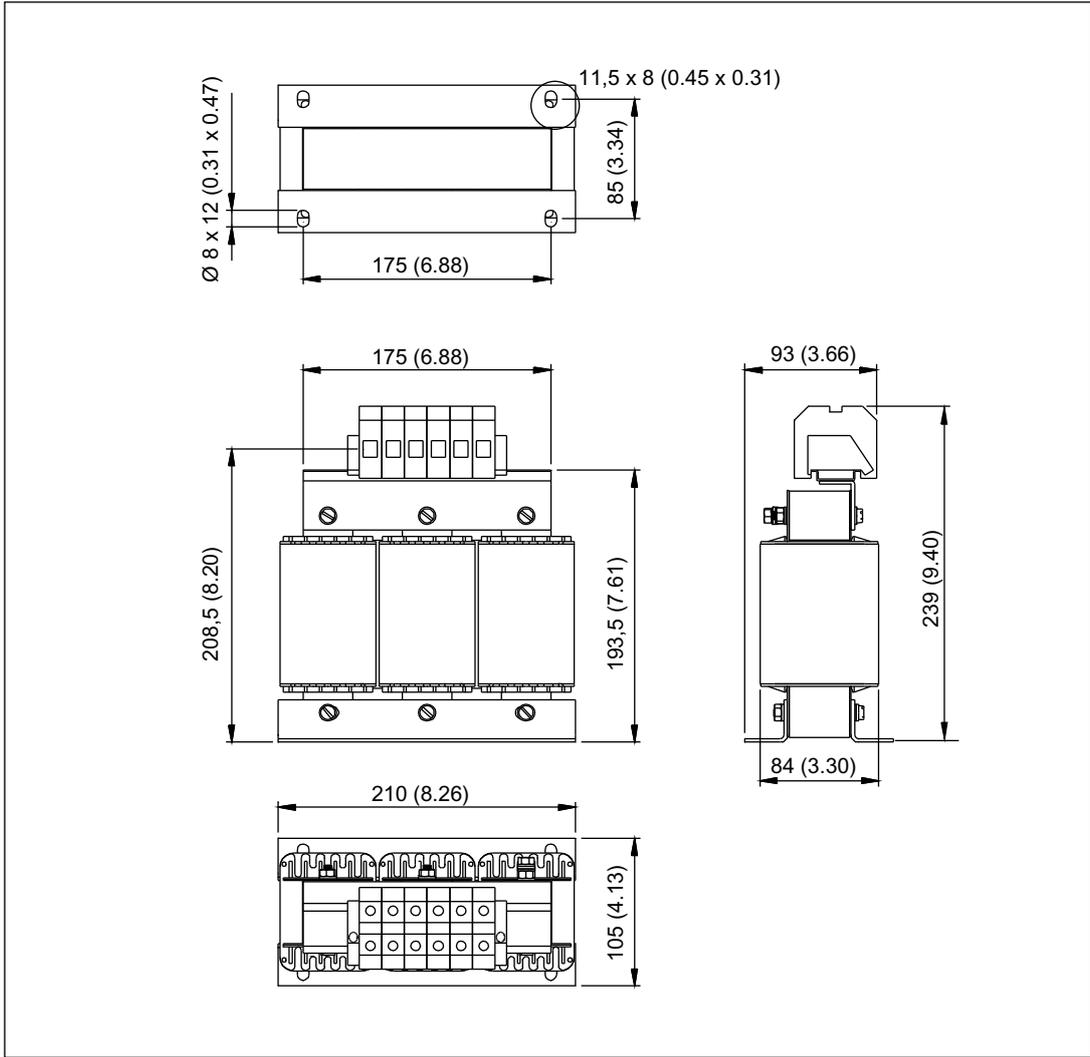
Dimension drawing: Line reactor for Basic Line Module (40 kW)
